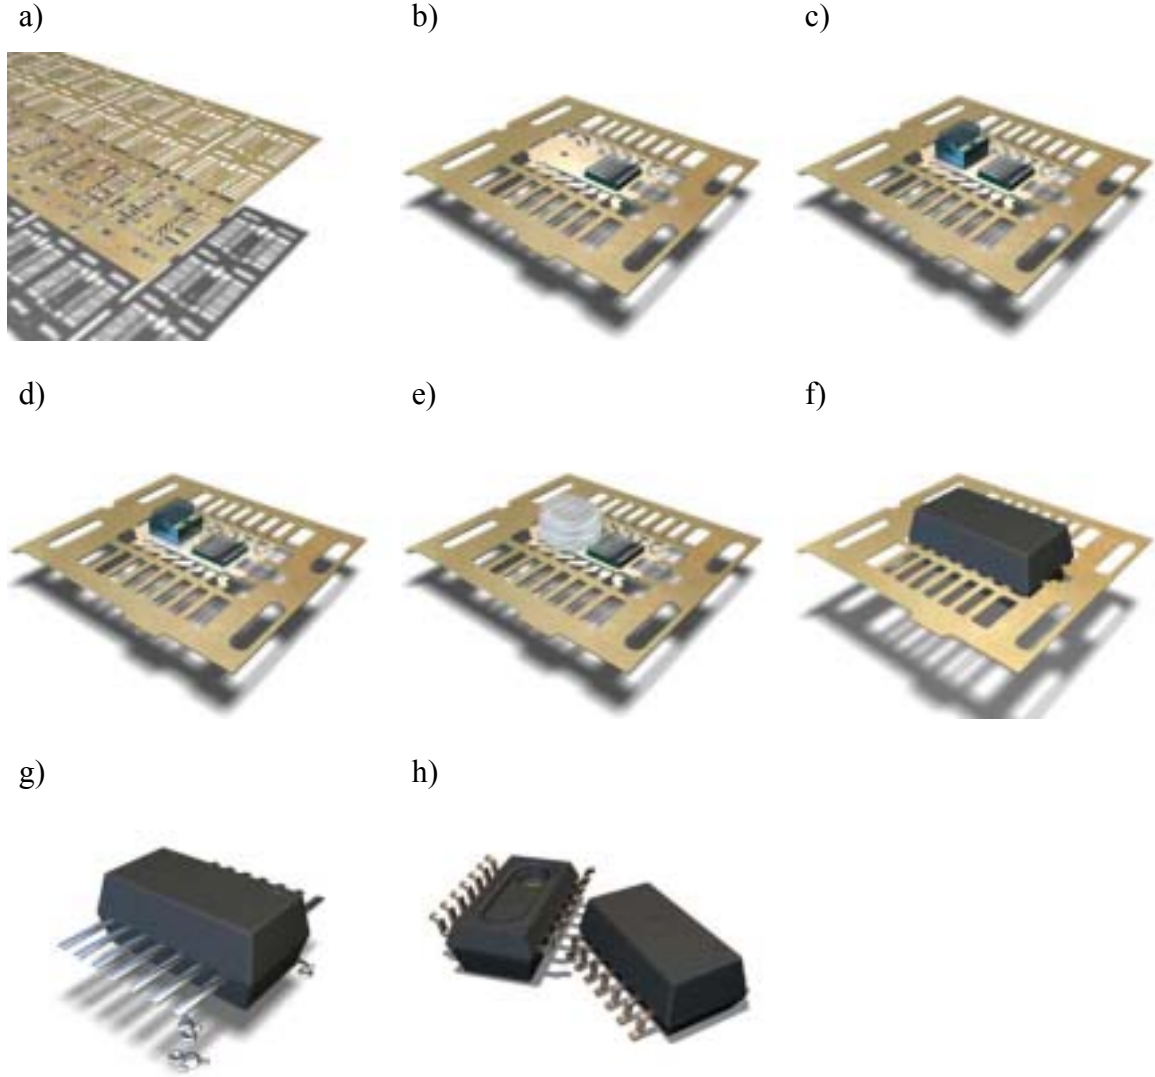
Process flow in Back-End. Leadframe is feed into the assembly line, a). ASIC and Sensor die is placed on leadframe, b) & c), followed by die-attach curing, d). Next comes wire bonding and globe-top, e) & f), before the assembled pieces are moulded, g). A trim & form follows (h).
